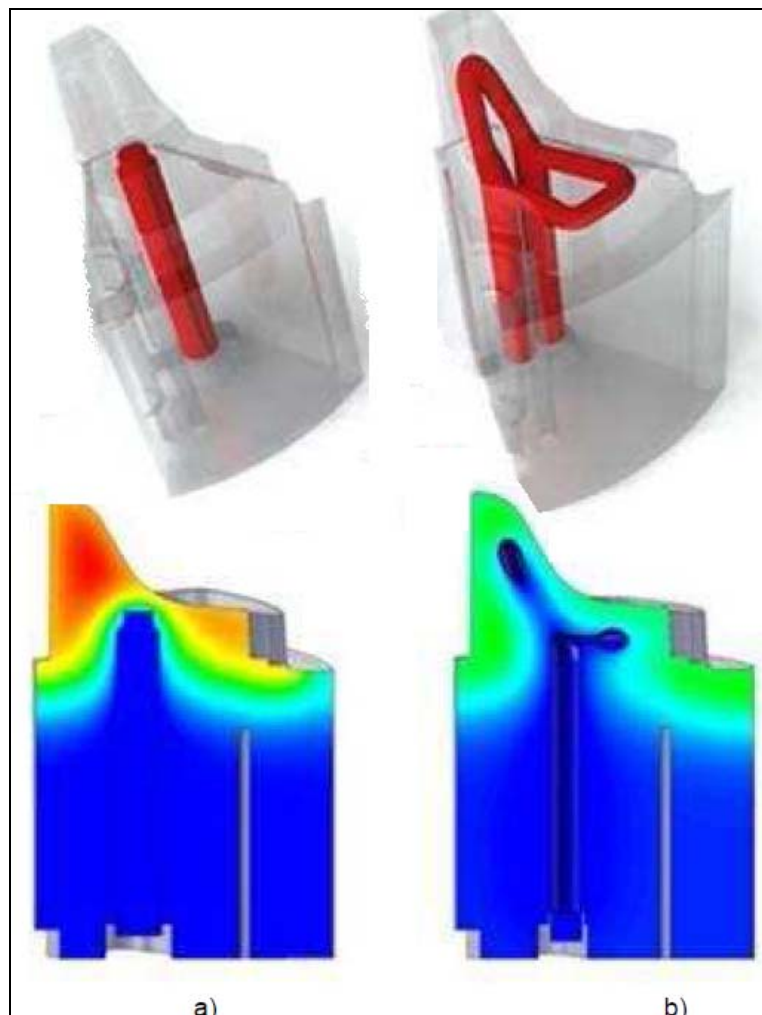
Shape of the cooling channel: a - traditionally drilled, b - produced by laser incremental techniques [1]
